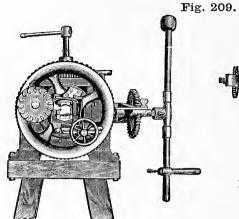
shows the machine as fitted for hand power, motion being transmitted to the several parts by means of gearing, as shown; while on the right is seen the pipe-rest and pipe held stationary by the adjustable jaws of the vise, which passes through the centre of gear, the rotary motion of which is imparted to the die held in the die box. When cutting pipe, the cutting off tool has automatic feed, cutting ends of pipe square and smooth.
